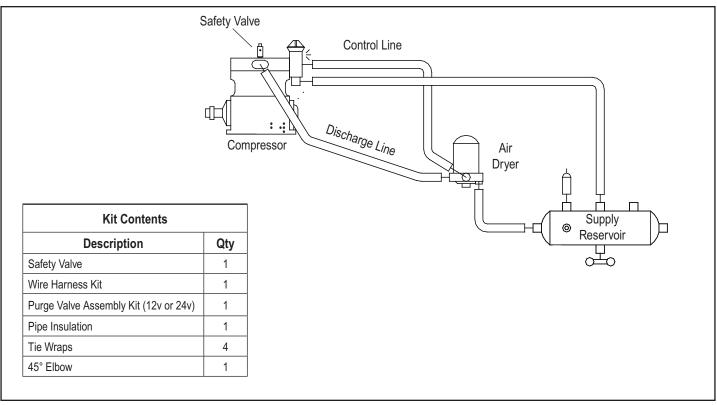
BENDIX® AD-9® AIR DRYER INSTALLATION MODIFICATION KIT
